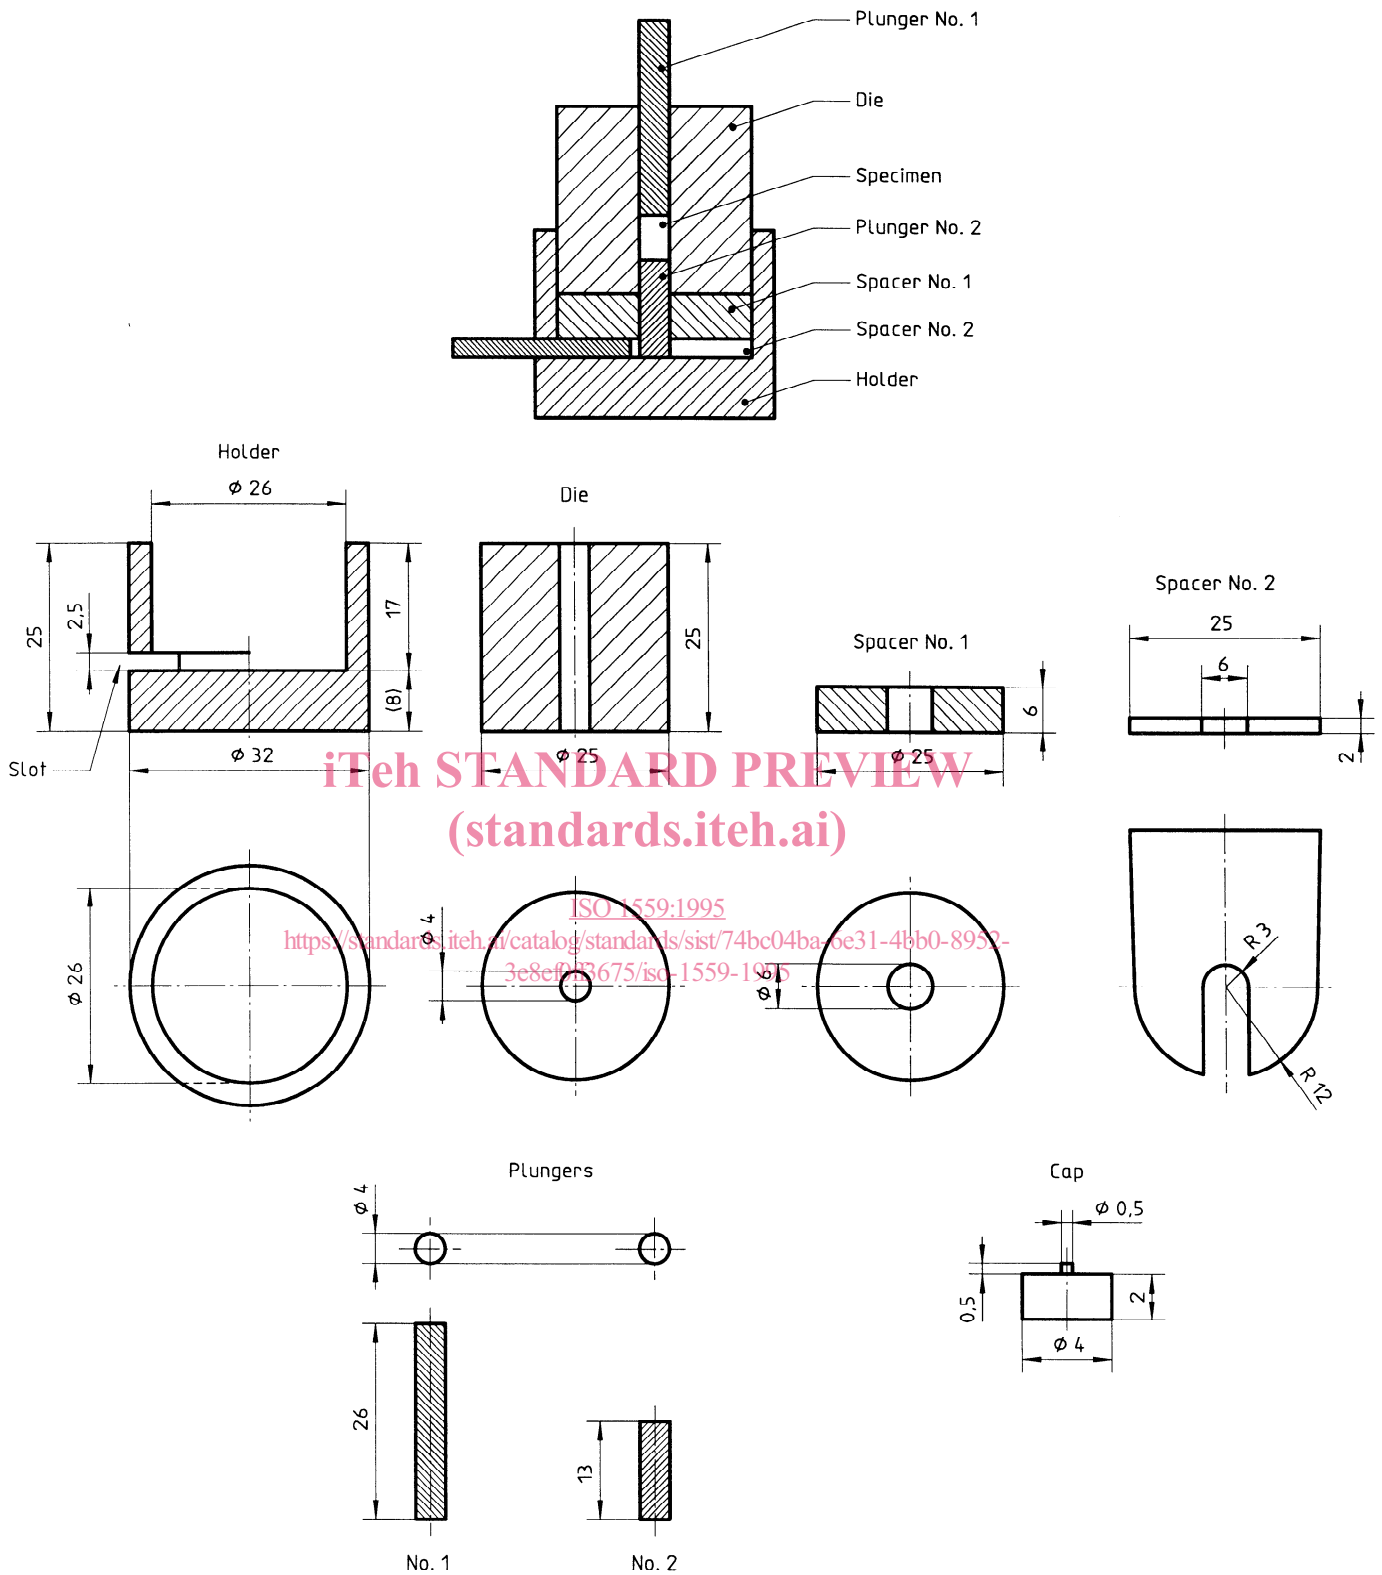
Apparatus for making amalgam test specimens, showing assembled apparatus and dimensions of each component
